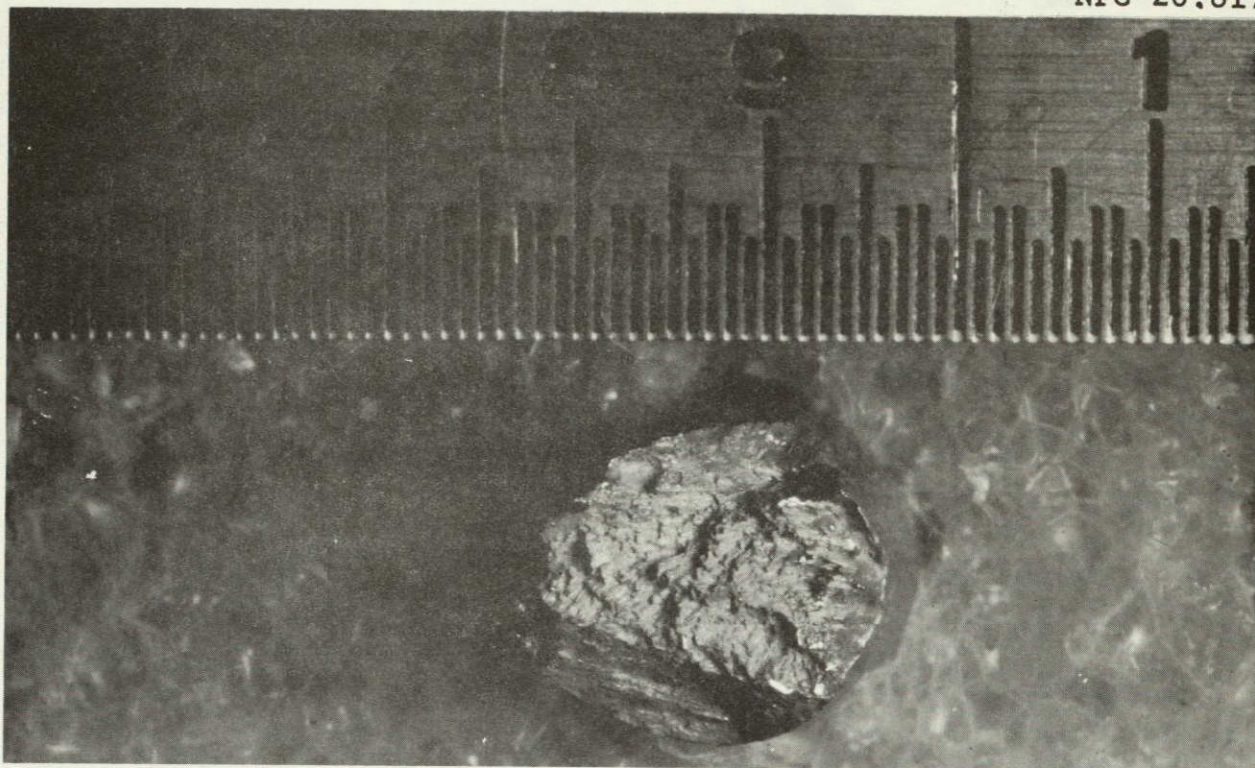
Macrograph (10X) of Aluminum 7039-T64 Welded and Treated to T61, Specimen BW-04: Irradiated at 140°R
